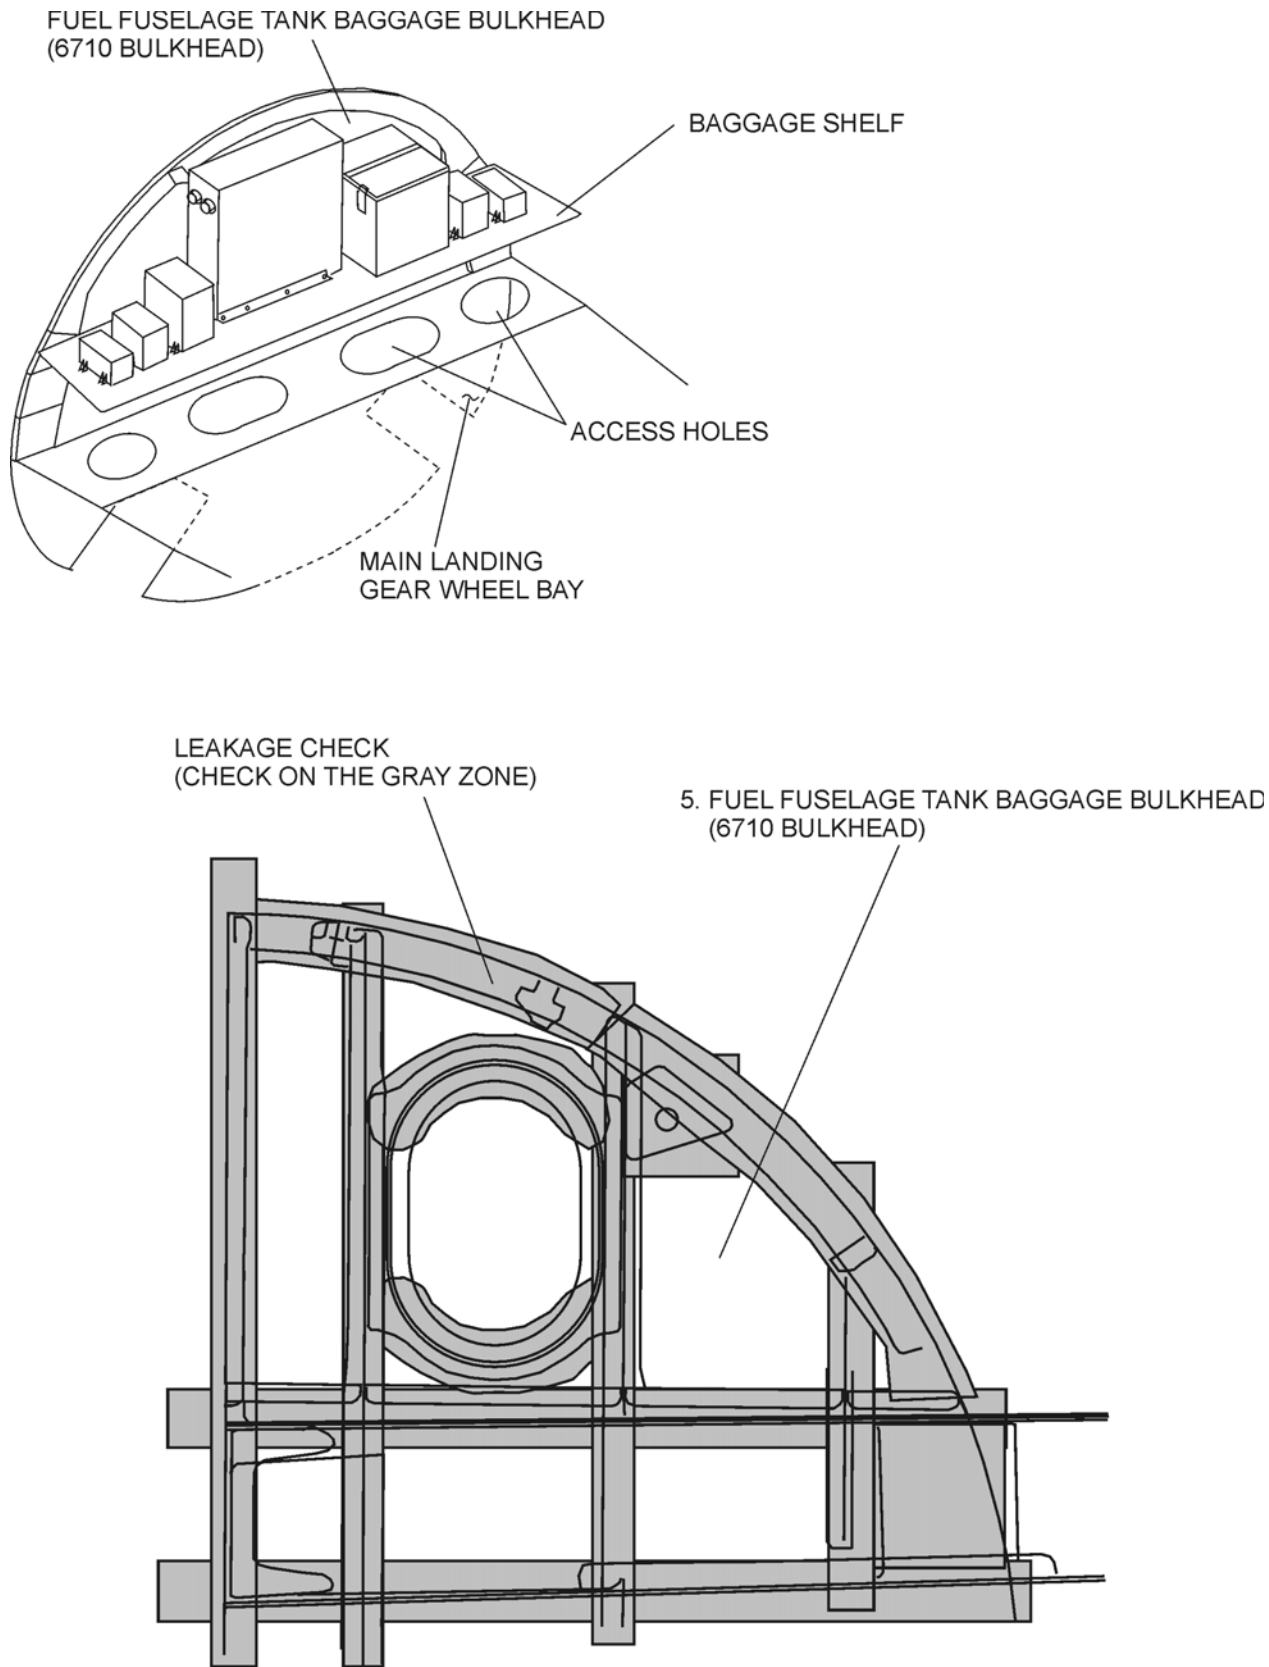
Fuel Tanks Acc. Pan, Components and Structure - Leakage Check (Sheet 3 of 3)
